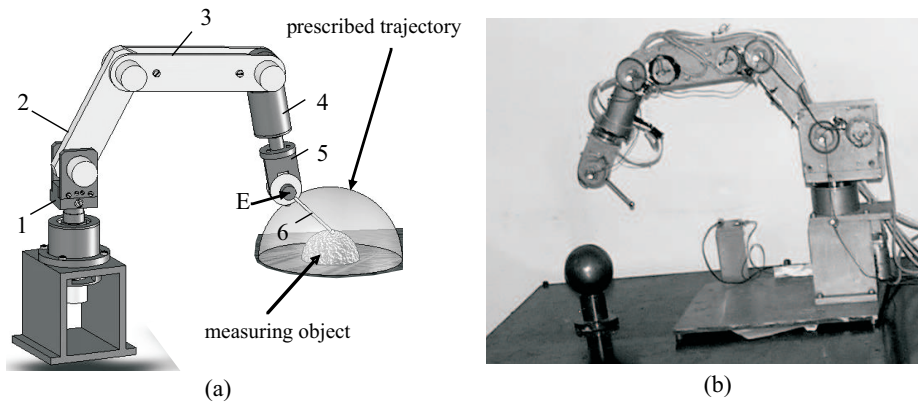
(a) 3D-drawing, (b) the manufactured measuring manipulator
